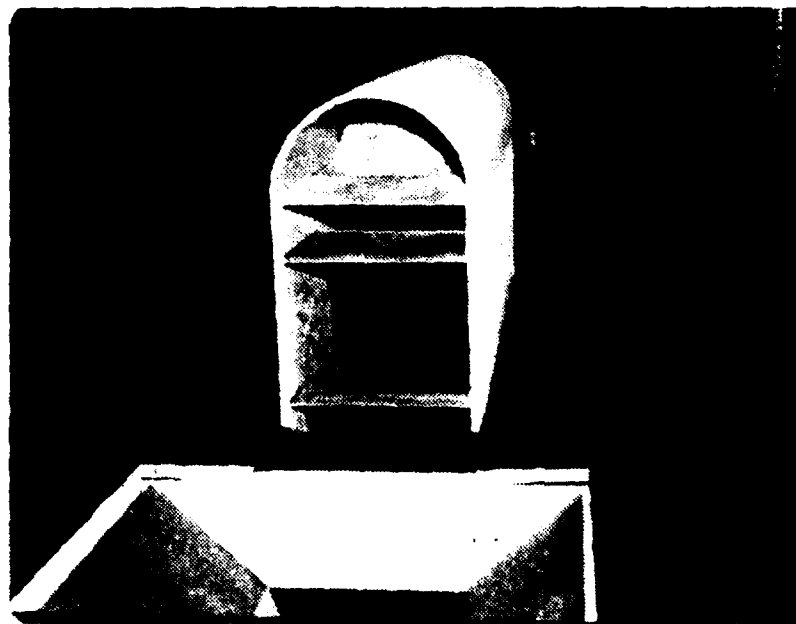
FAIRING DUCT ASSEMBLY AND PLENUM INSTALLED.
